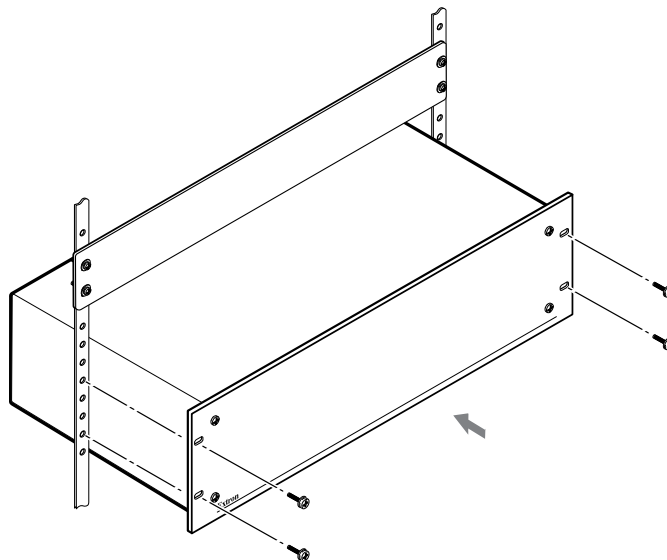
Mounting the ISM 824 Multiswitcher
